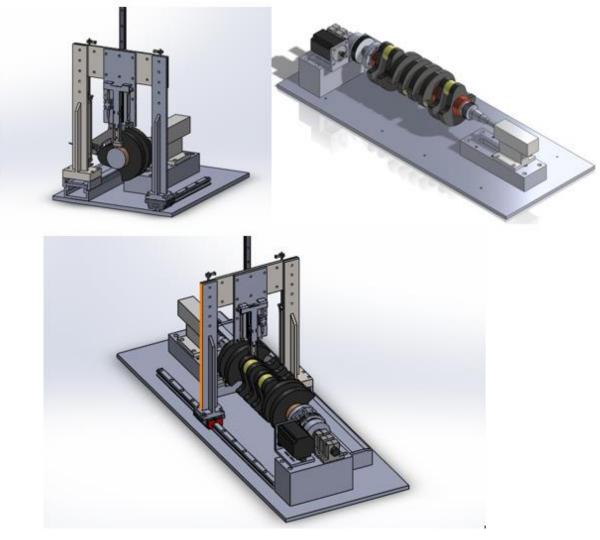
DIFFERENT VIEWS OF FINAL DESIGN OF CAD MODEL
